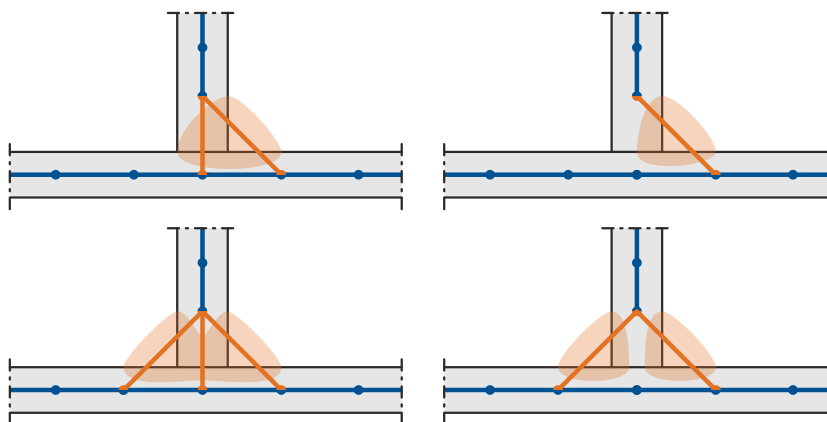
Modelling of welds in shell models by inclined shell elements for full penetration welds (left) and fillet welds (right) [88]
